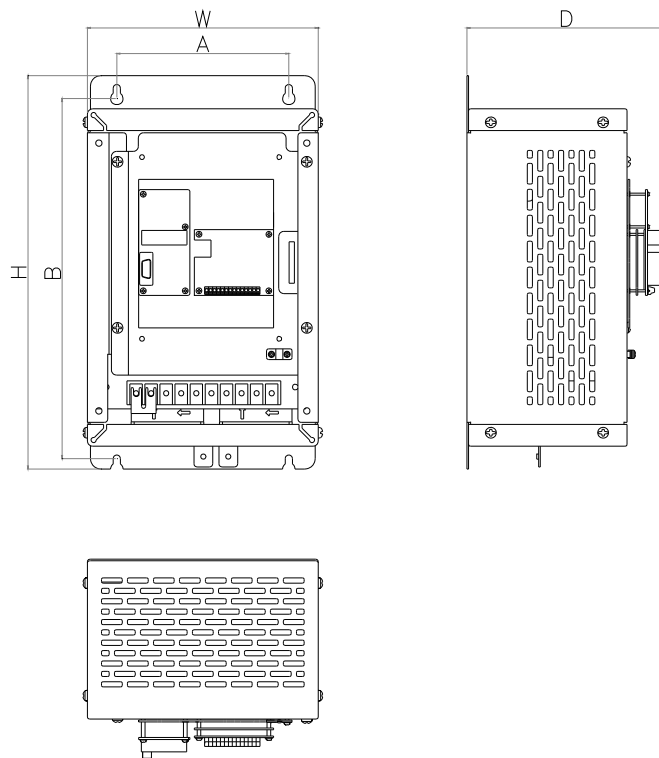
Schematics for Installation Dimensions of Integrated Escalator Drive Controller
